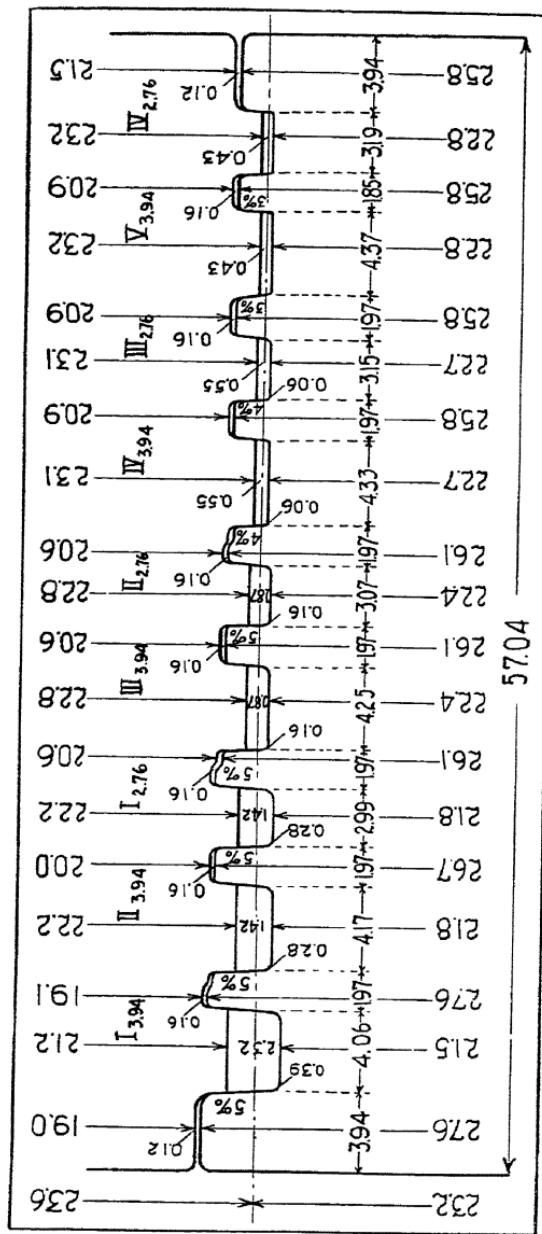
Scheme for Developing a Roll Drawing for a Set of 2-High Rolls or for a Reversing Mill.
